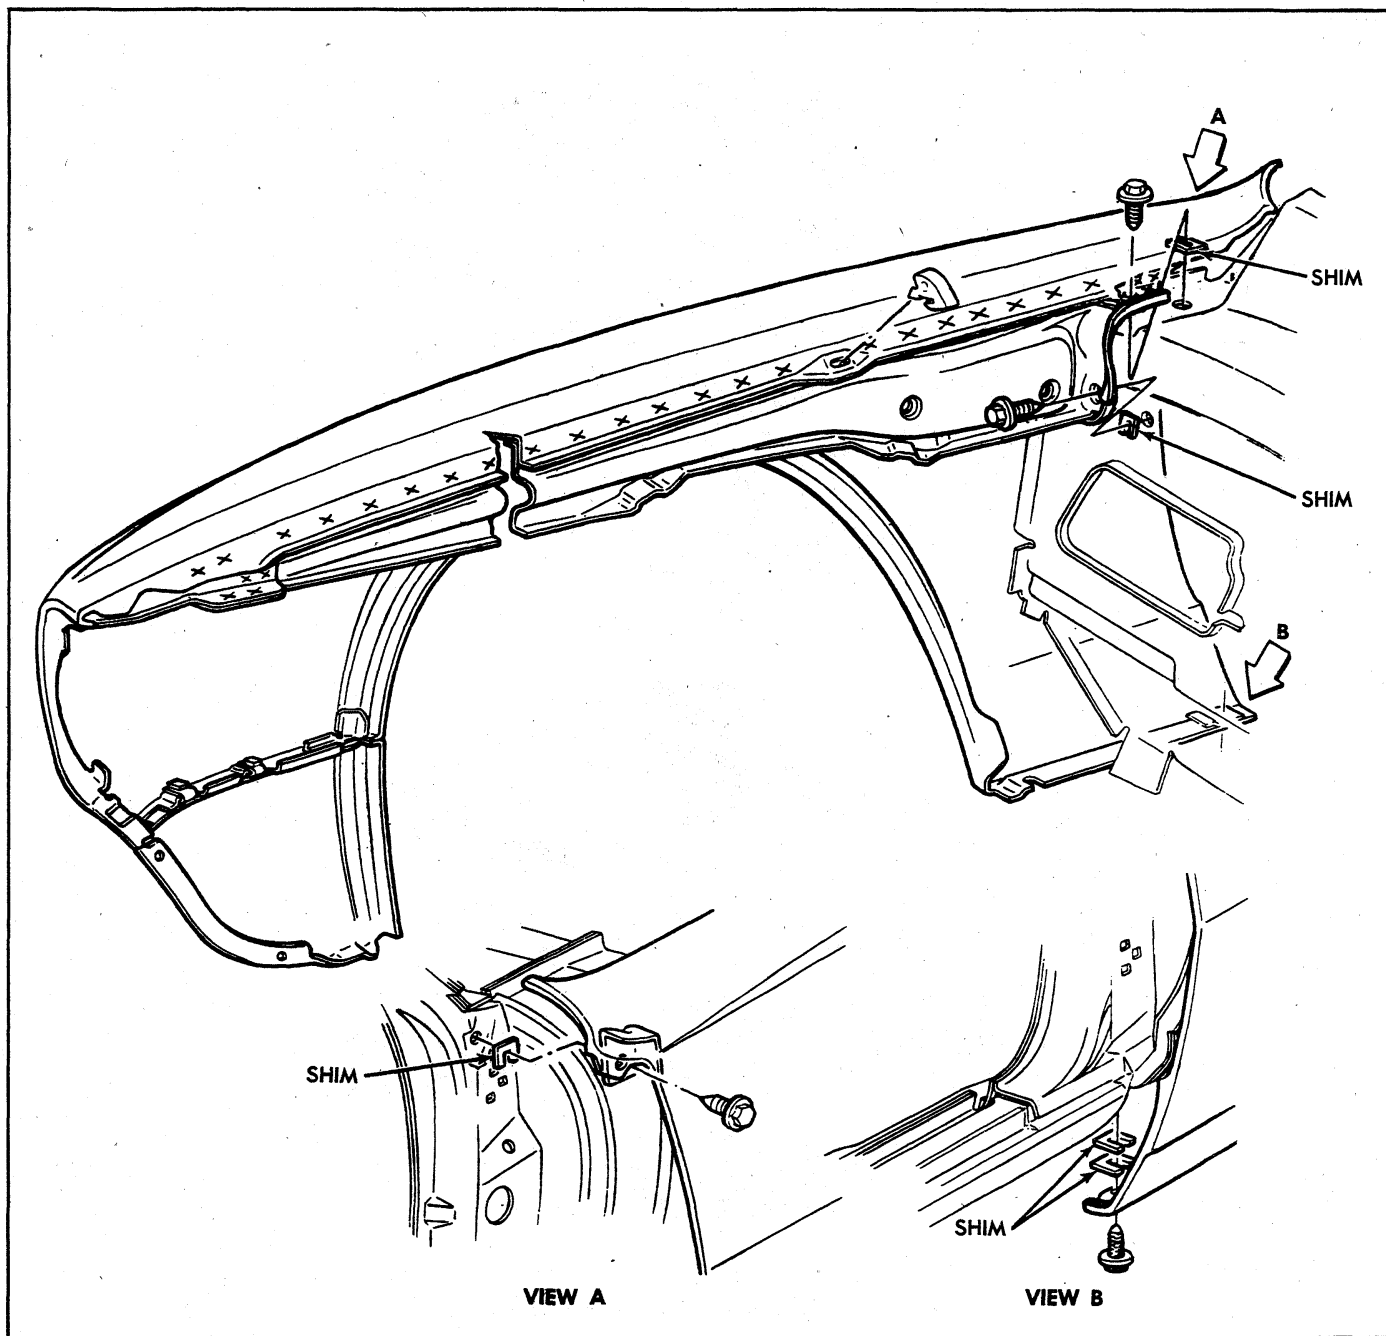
Fender to Cowl and Rocker Panel Shimming - Camaro
